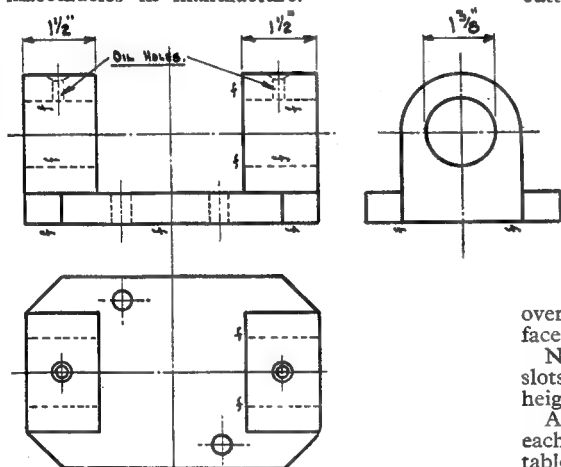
Bearing bracket for boring bar. Material, cast-iron
